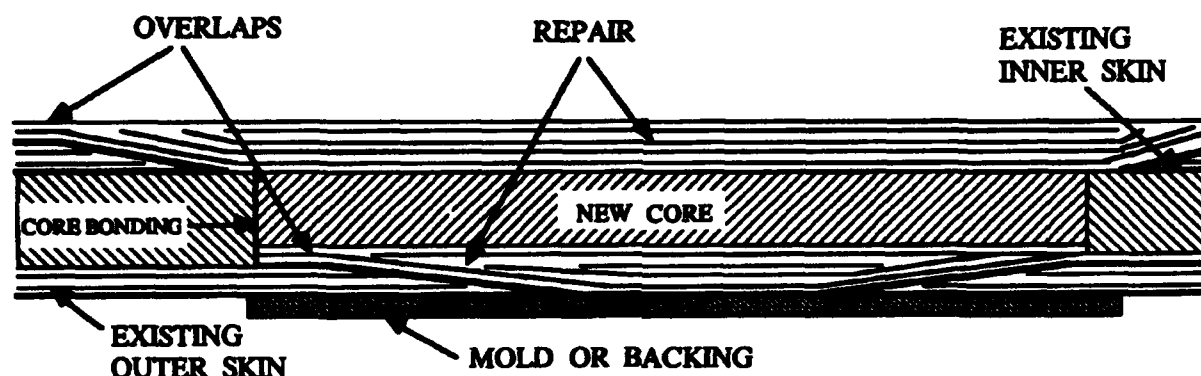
Technique for Repairing Damage to Sandwich Construction [USCG NVIC No. 8-87]
